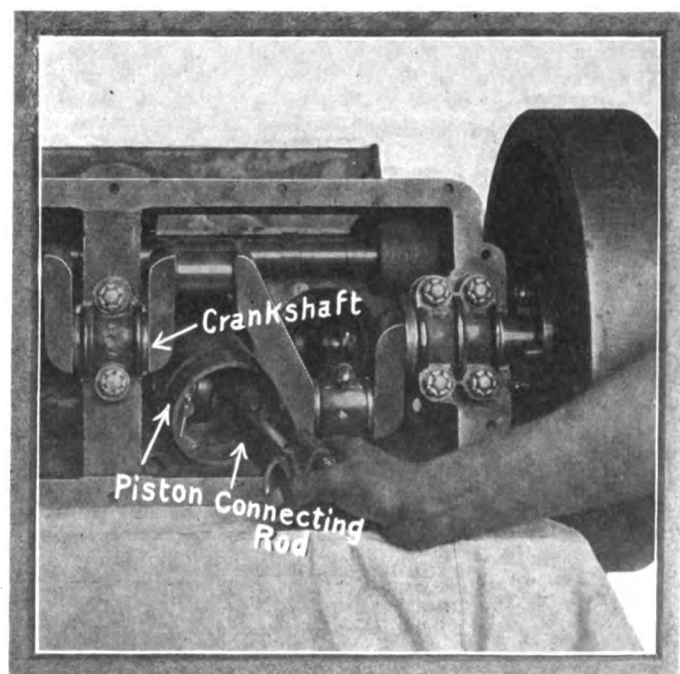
The piston, connecting rod and attached parts may sometimes be withdrawn by removing the connecting rod bolts
